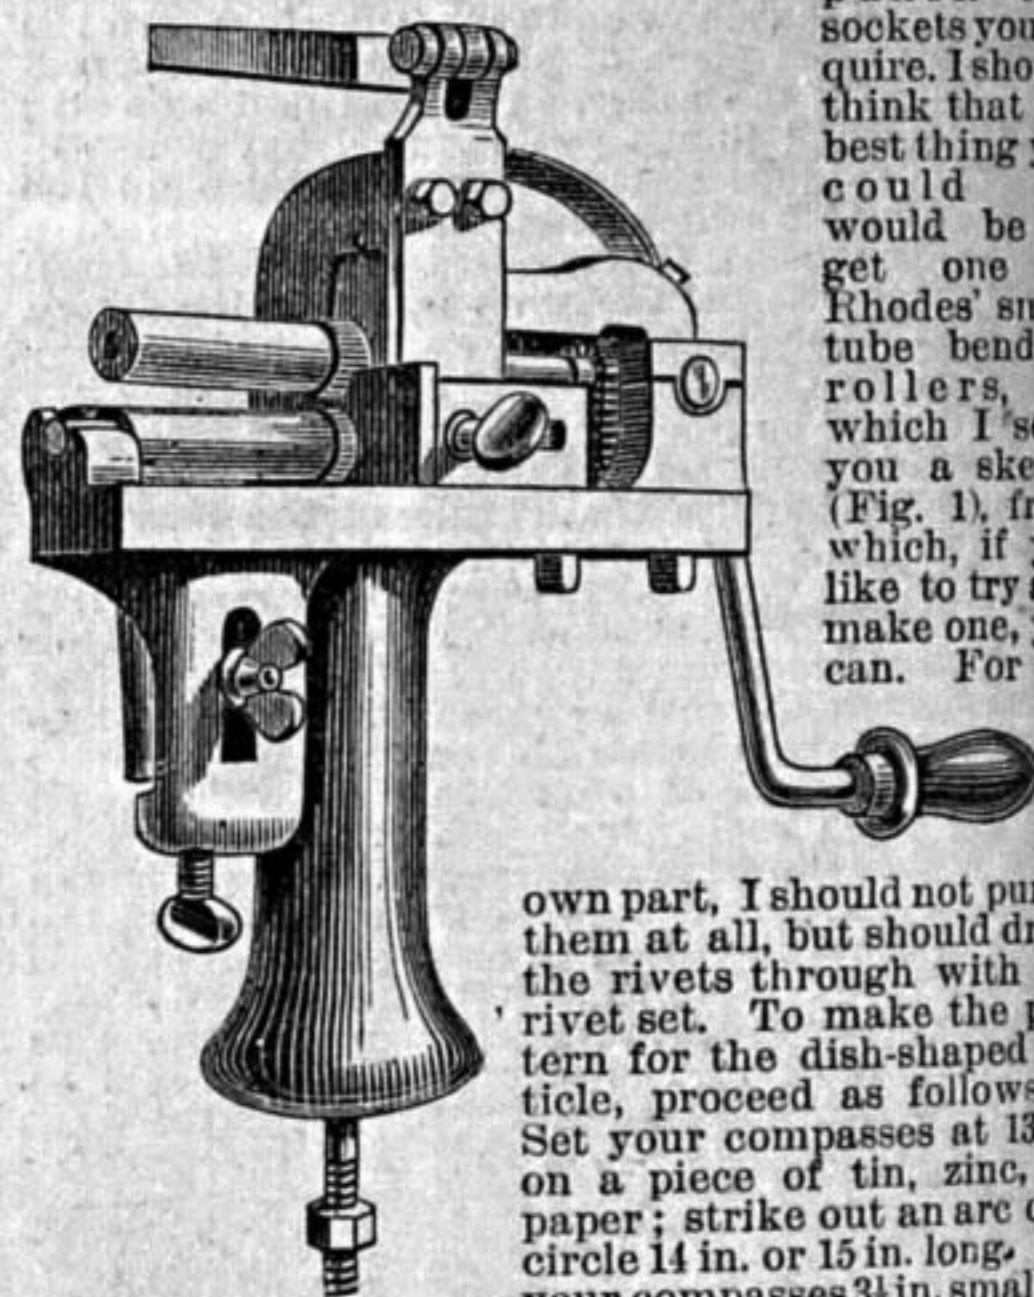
Machine for forming or bending Small Tubes or Cylinders, with or without Bead, 6 in. long, 1 in. and upwards in Diameter.
